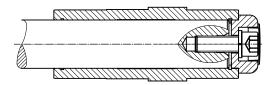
Gear unit mounted to shaft without a shoulder using the fastening element
